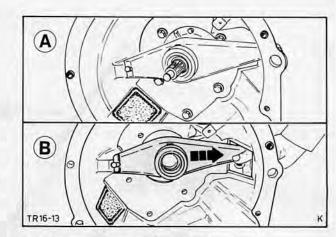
Remove thrust bearing with release lever A – Unbolt clutch housing
